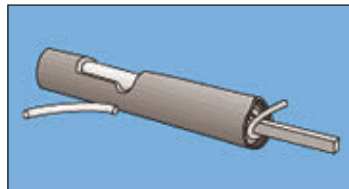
The wire wrapping tool. Excess wire is cut off as the tool starts to wrap.
